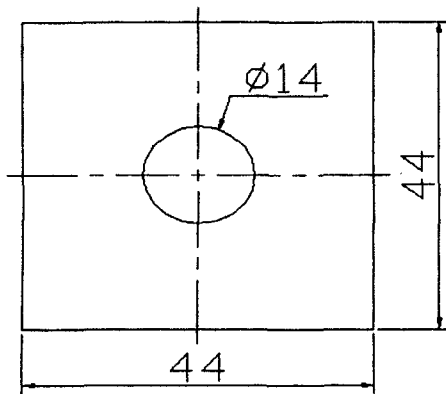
Shape and dimension of multiple crevice corrosion test specimen(unit:mm).
